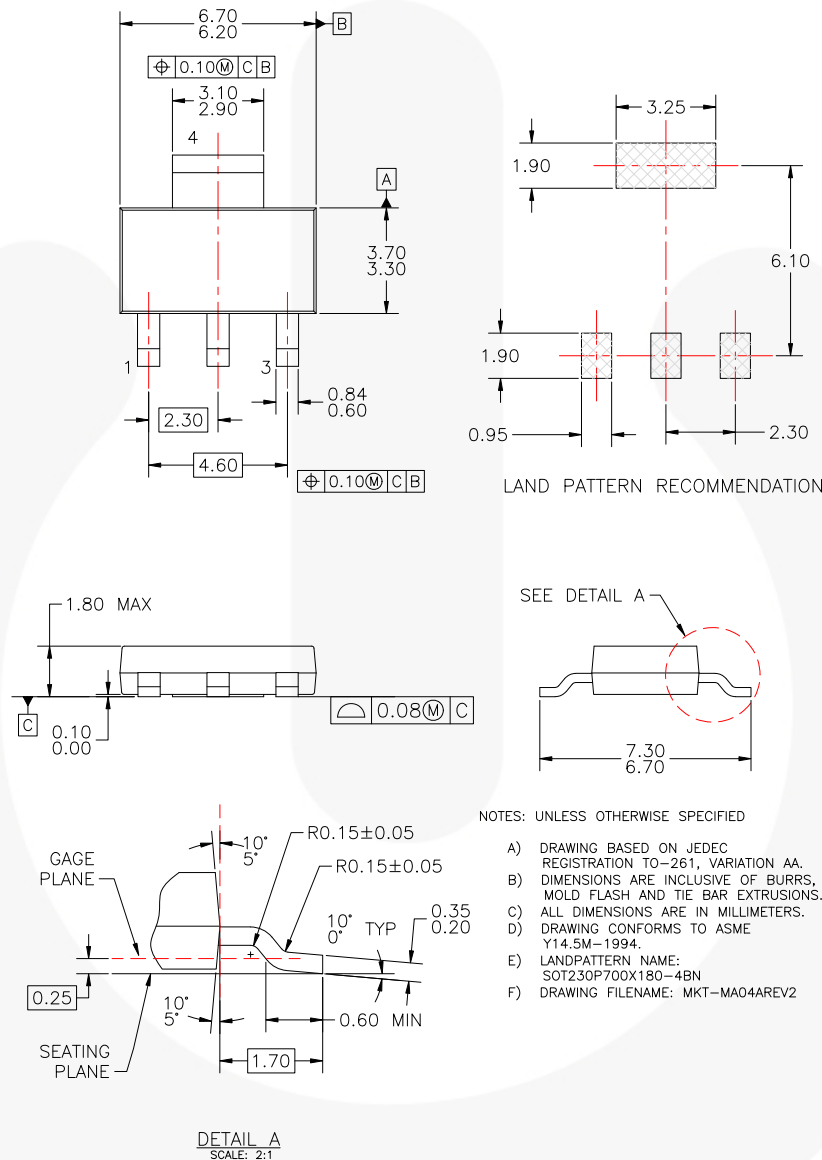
MOLDED PACKAGE, SOT-223, 4-LEAD
